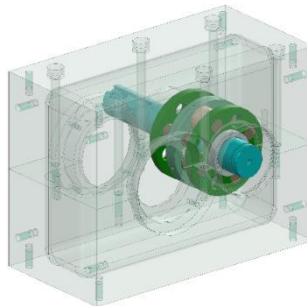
Original ‘steel’ carousel assembly in indexing gearbox housing.
